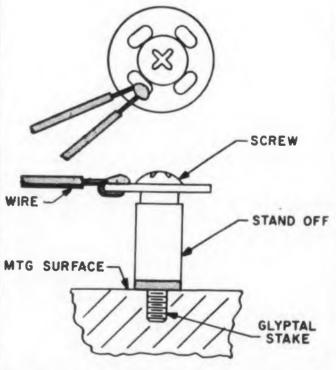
Wires are soldered to the plate which can be insulated from the mounting surface by a ceramic stand-
